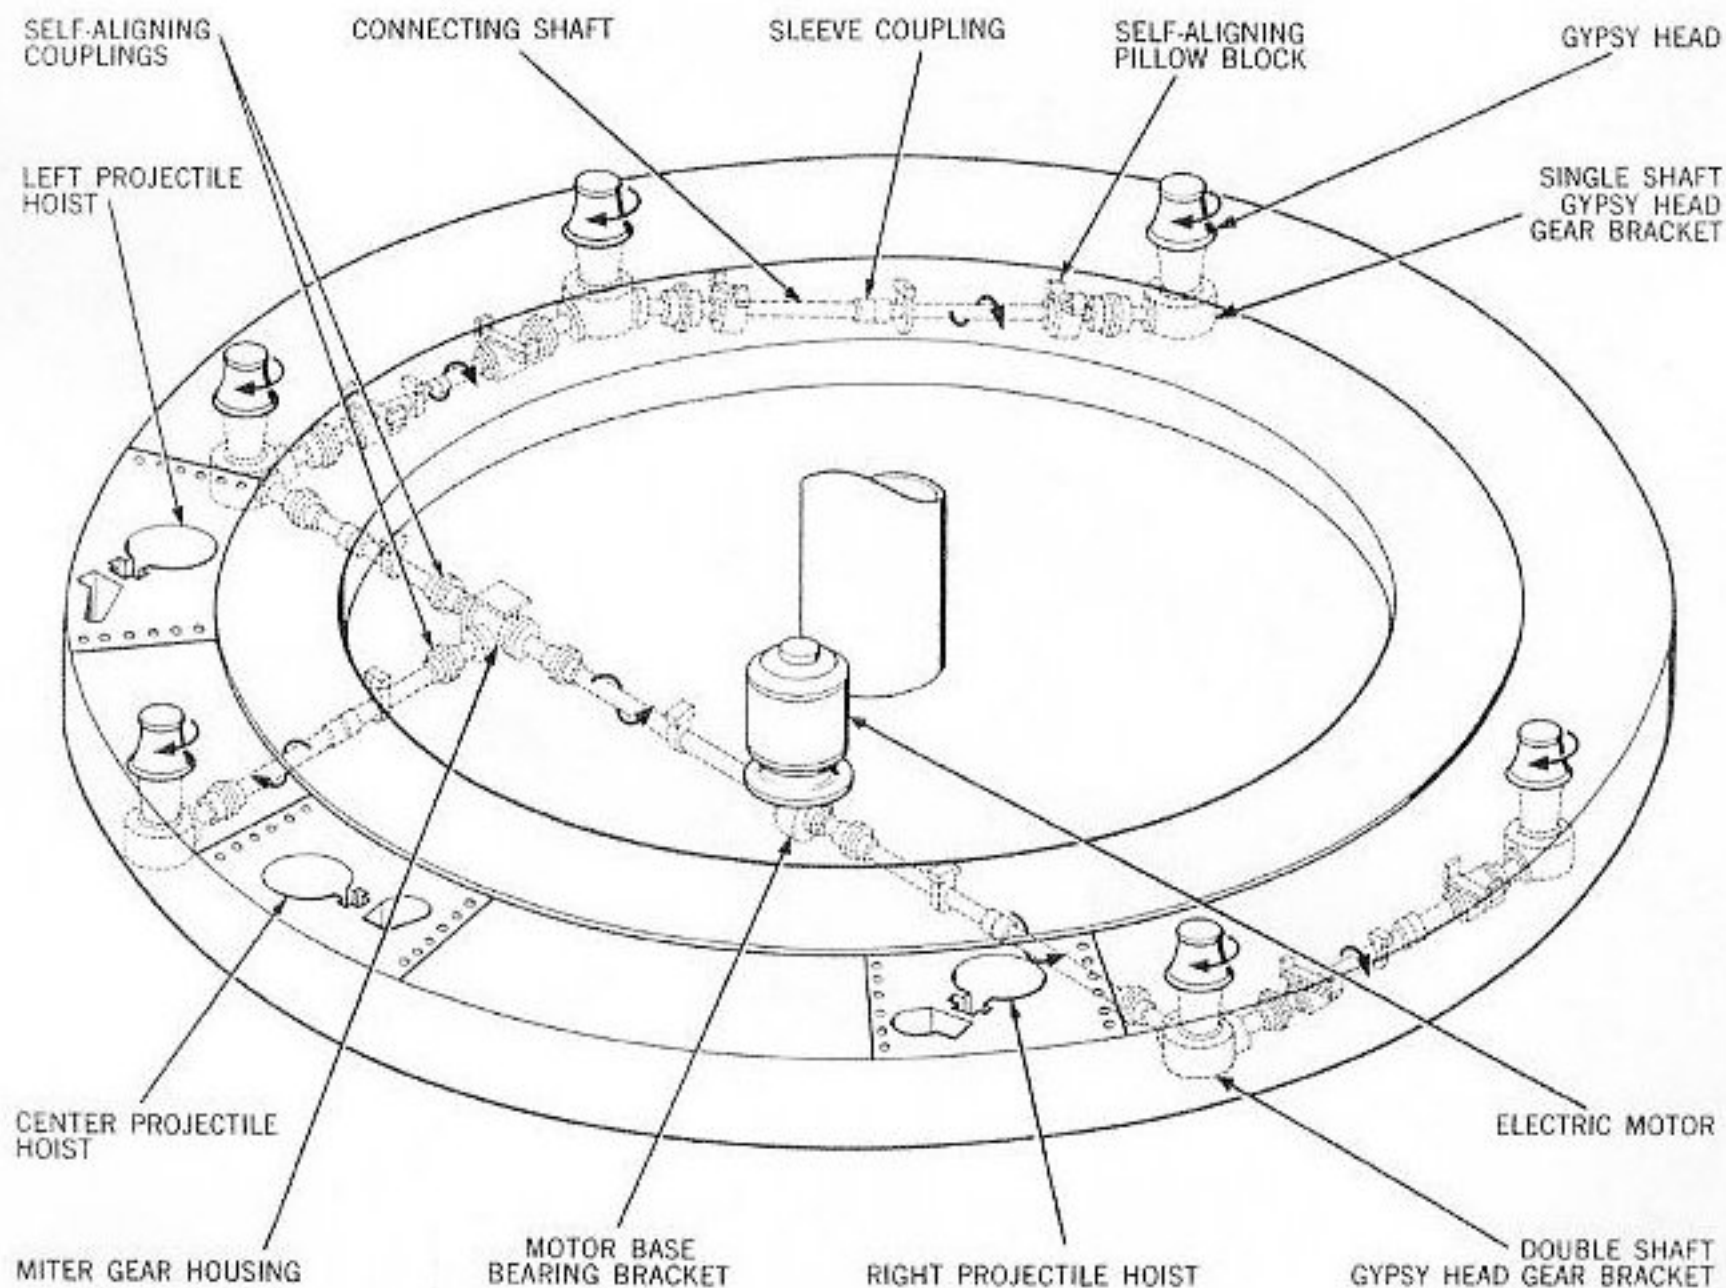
16-inch Parbuckling Gear Mk 1 Mod 0, Schematic Arrangement
